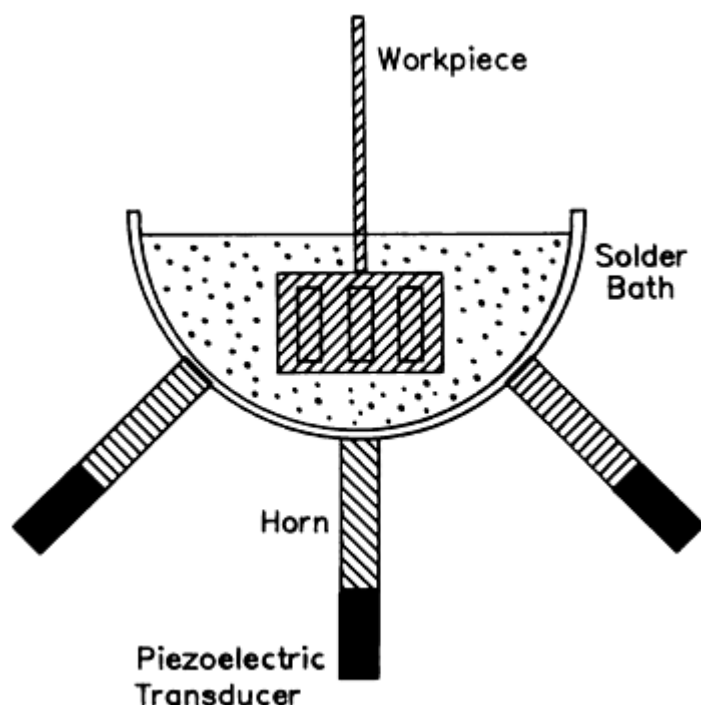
ULTRASONIC SOLDERING BATH EQUIPMENT
